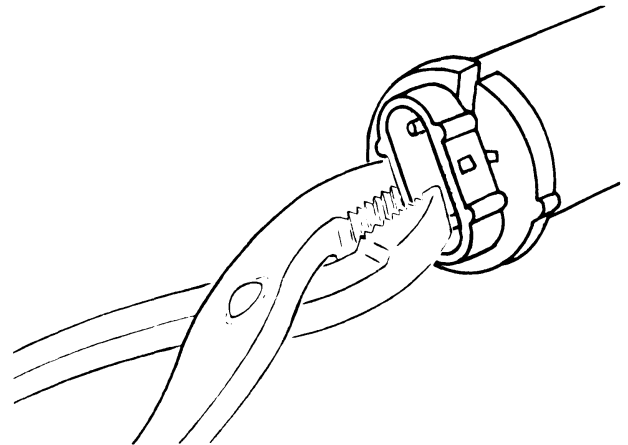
Disassembling Motor, Seal and Impeller Assembly
